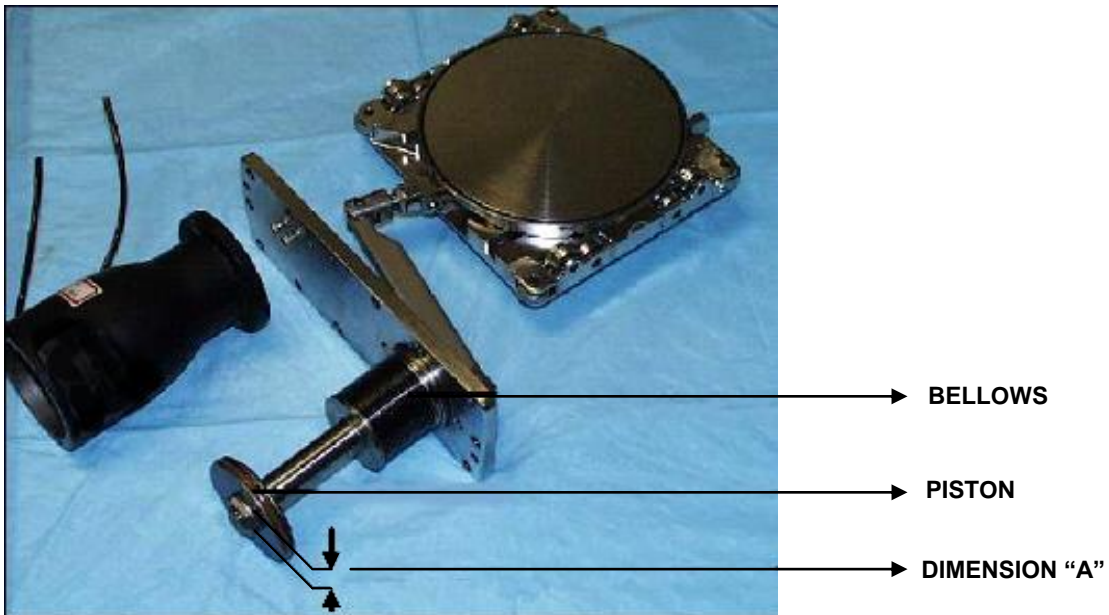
BELLOWS AND PISTON SHOWN WITH ACTUATOR HOUSING REMOVED
